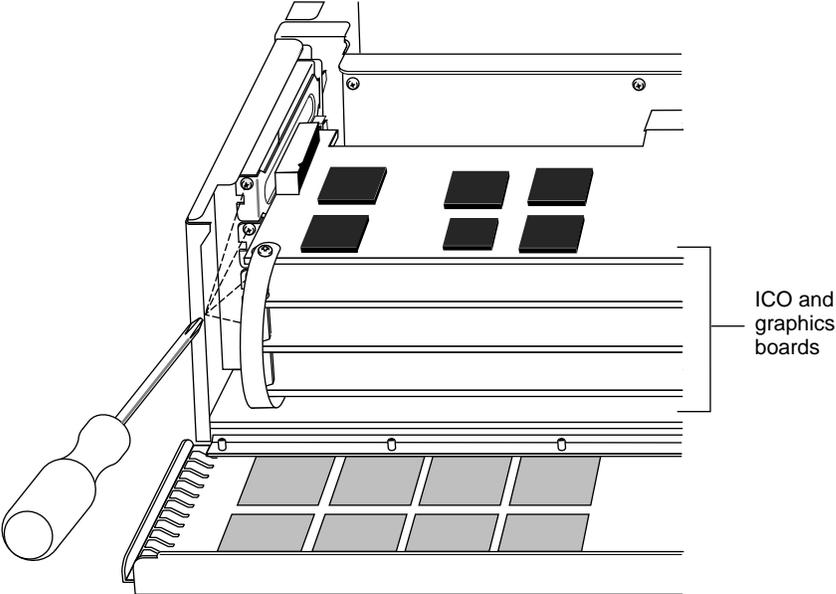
Attaching the Graphics Board Set to the Chassis
